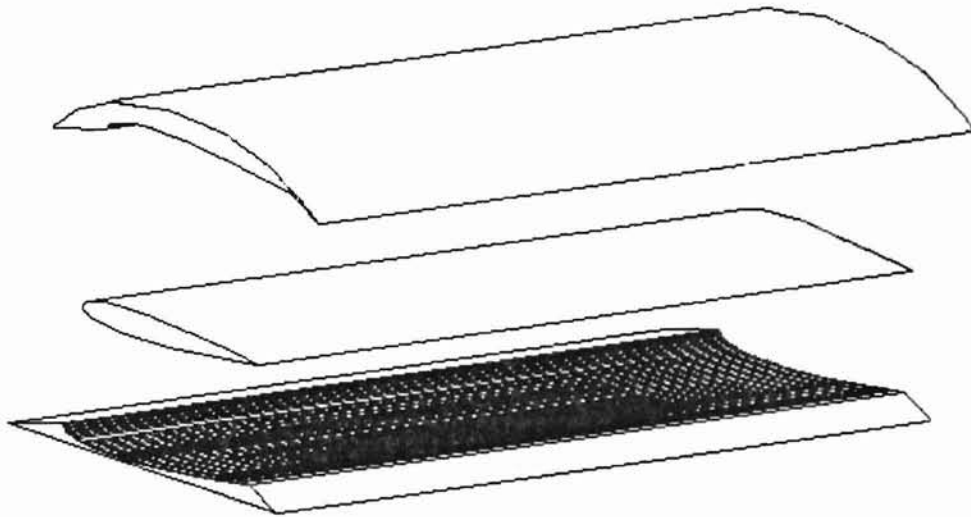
SLA NACA0012 wing with SLA curing fixture halves
